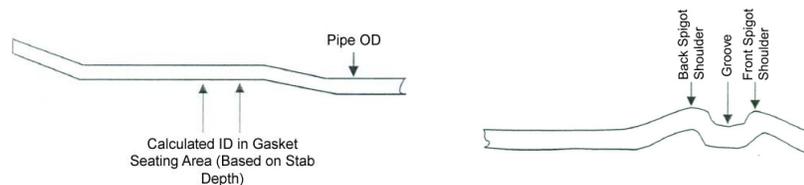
, b: Critical Bell Dimensions, Spigot Dimensions
